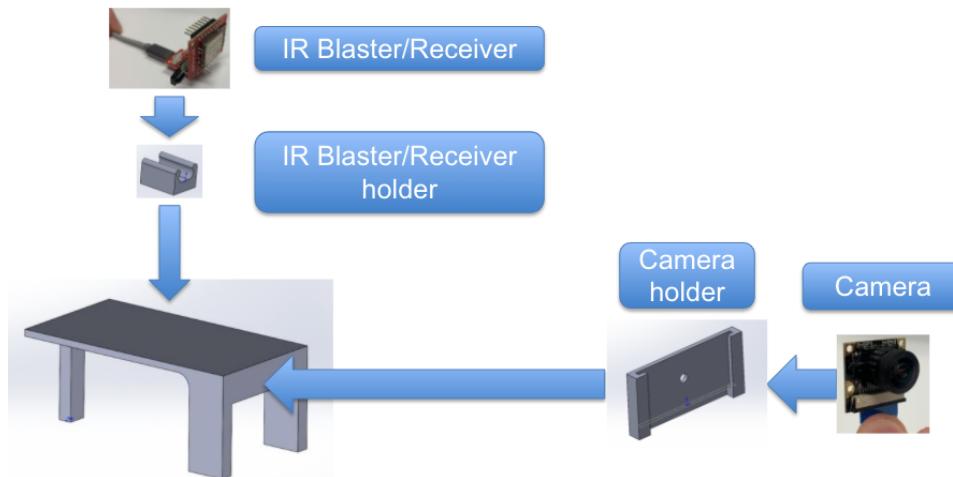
Assembly Process for the Camera and the IR Blaster to the Chassis
